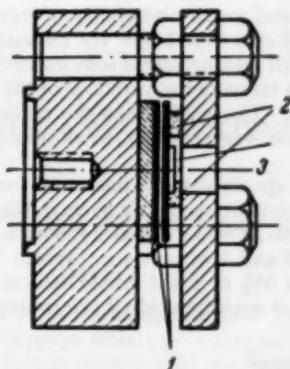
Support for mounting the specimens. 1—Electrodes; 2—rubber specimens; 3—mirror.
